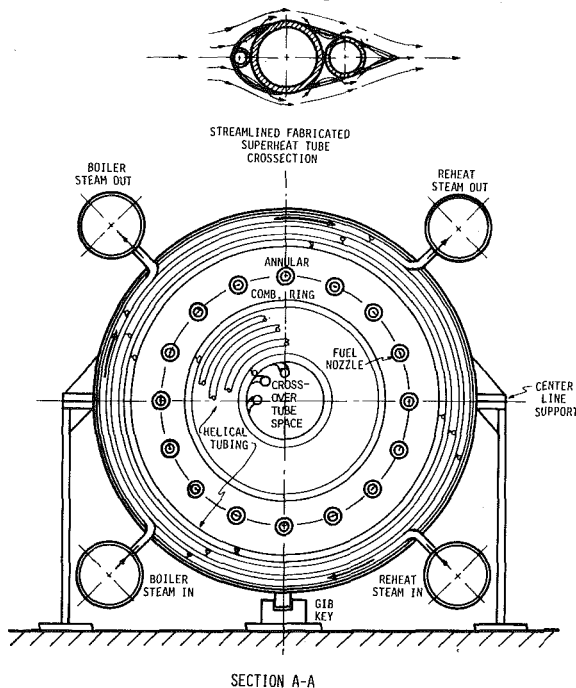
Cross section of reheat combustor/superheater showing helical tube arrangement, annular combustor cap, fuel nozzles and steam headers. At top is shown streamlined fabricated superheat tube cross section.
